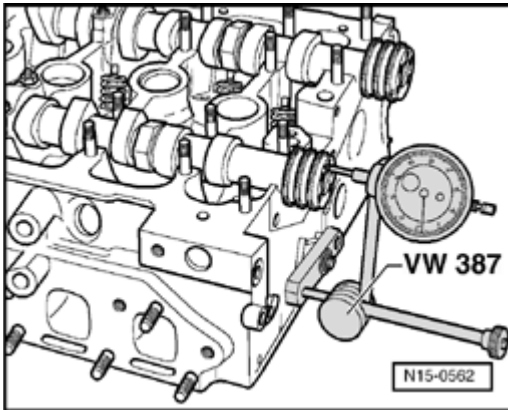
Securing Dial Gauge Holder VW 387 To Dial Gauge VAS 6079 On Cylinder Head
